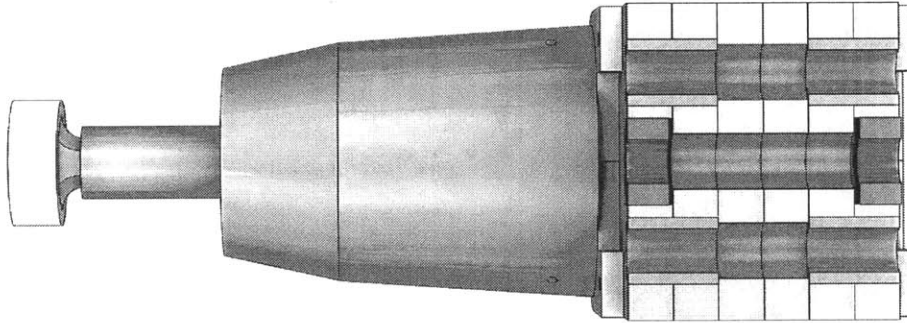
Section view of the Z-Axis. Both axes and clamps have the same linear carriage design.
